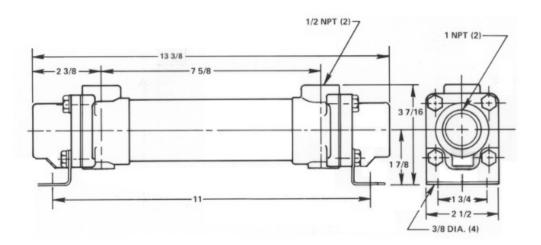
Typical Outline Drawing of External Heat Exchanger (Do not use for construction.)
